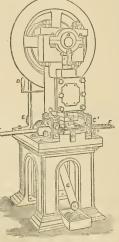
Cutting Machine. jaws by acting on their inclined ends. Directly the strain on the
